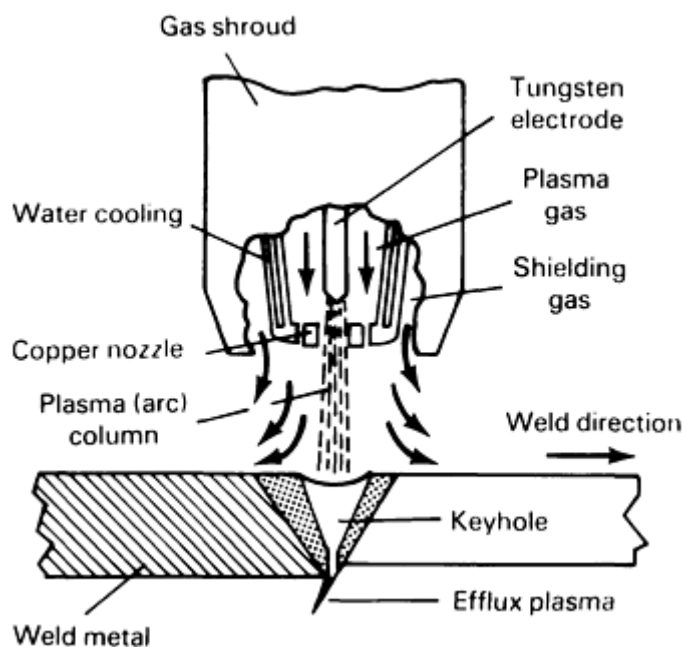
PLASMA ARC WELDING PROCESS, SHOWING CONSTRICTION OF THE ARC BY A COPPER NOZZLE AND A KEYHOLE THROUGH THE PLATE
